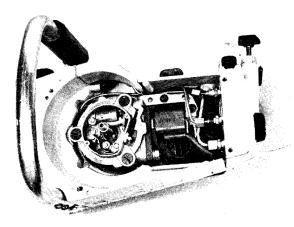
View of Oil Lines Used on Automatic Oiler System
